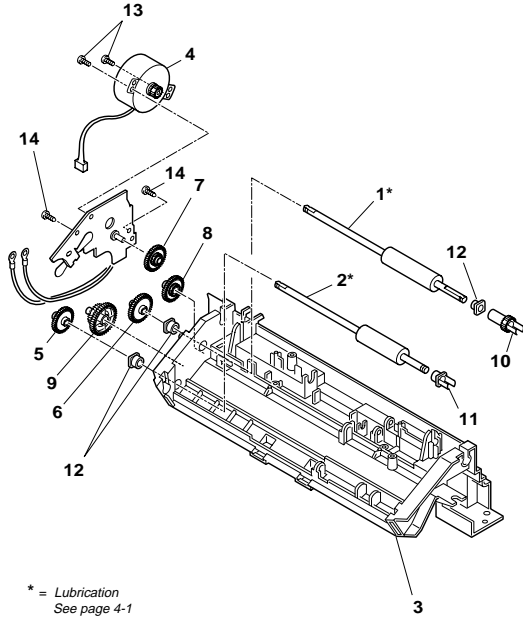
AUTO SHEET FEEDER & PCNT BOARD
